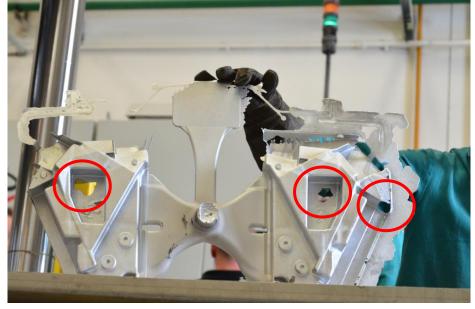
2mm LPDC casting showing misrun. Courtesy of FMB
